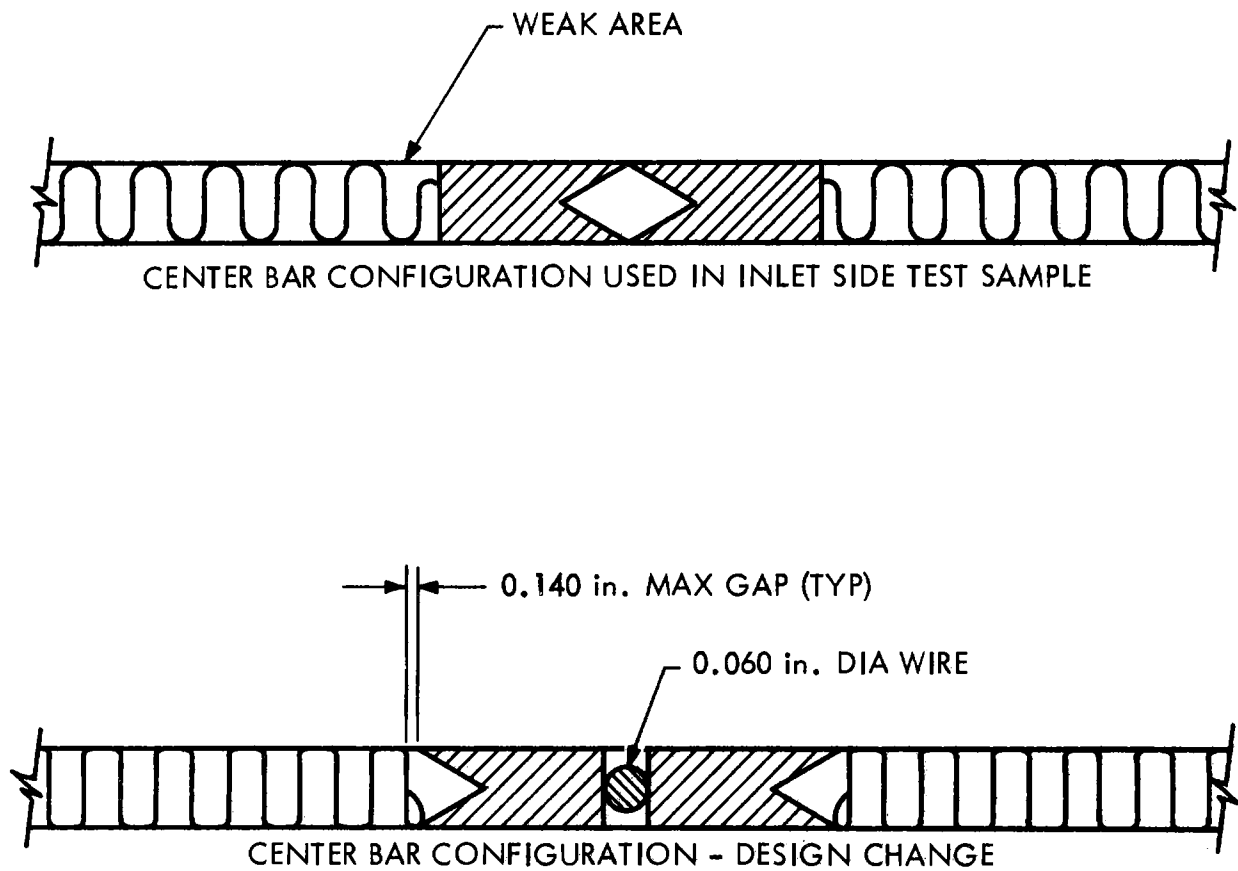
NITROGEN INLET END OF IMPROVED PRECOOLER
